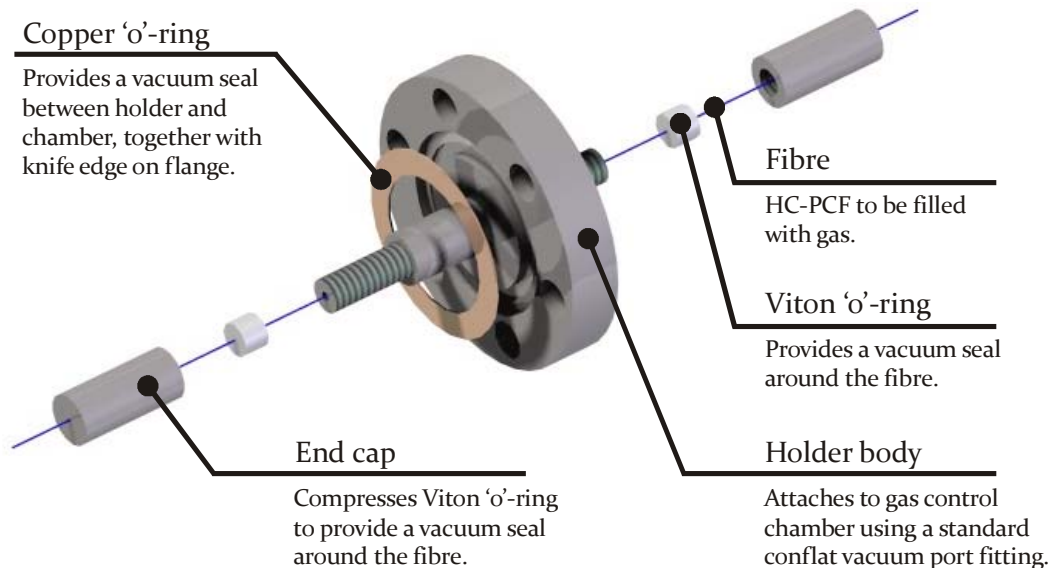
This improved assembly is used to be hermetically seal a fibre within the stainless steel gas chambers used for loading rubidium vapour. The standard knife-edge seal on the flange allows UHV connection to a vacuum port.
